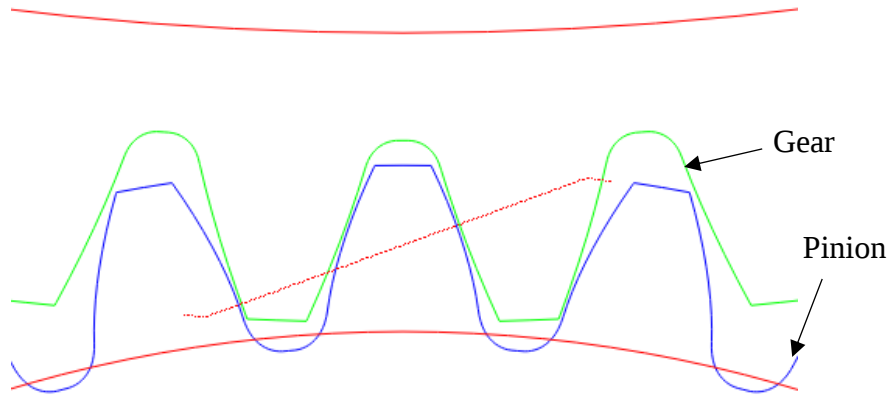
Gear Mesh of Gear Pair of 45 and 57.
